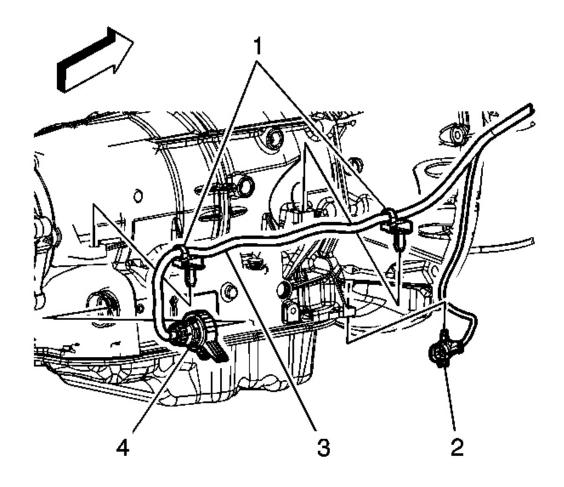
View Of Vent Hose Assembly Courtesy of GENERAL MOTORS CORP.
